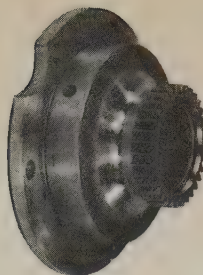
Stationary gear which is mounted in the side housing. (Toyo Kogyo Company, Ltd.)
